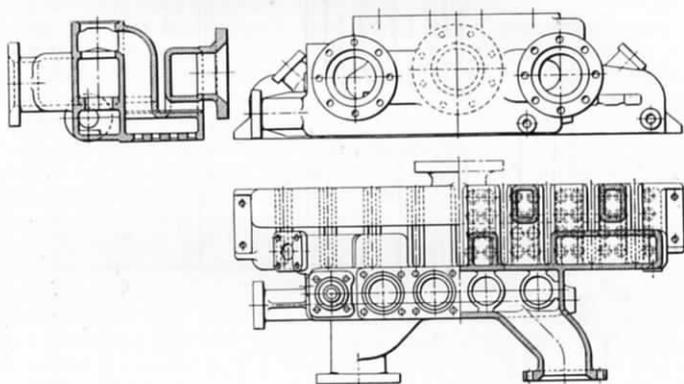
THE "MeLeSCO" MULTIPLE VALVE REGULATOR.
